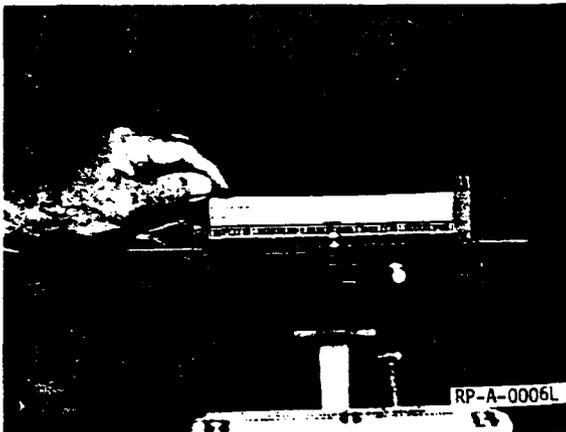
CAP POSITIONED OVER THE BRIDGE (PAR. 5.5.2.1.1K)
